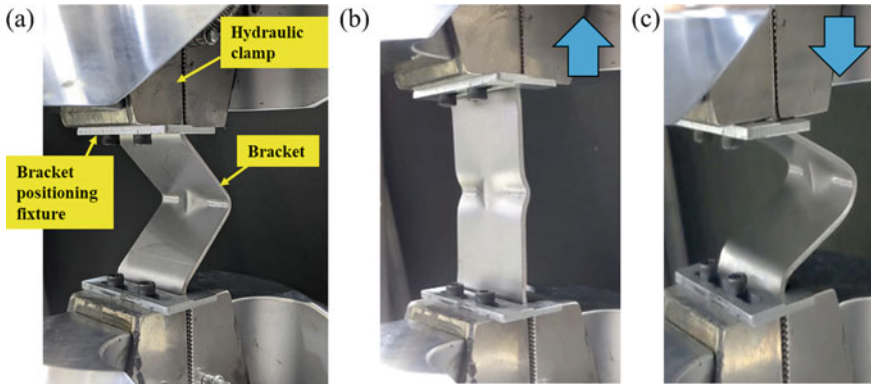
a Darted bracket clamped for the rigidity test, b flattening test, and c folding test
